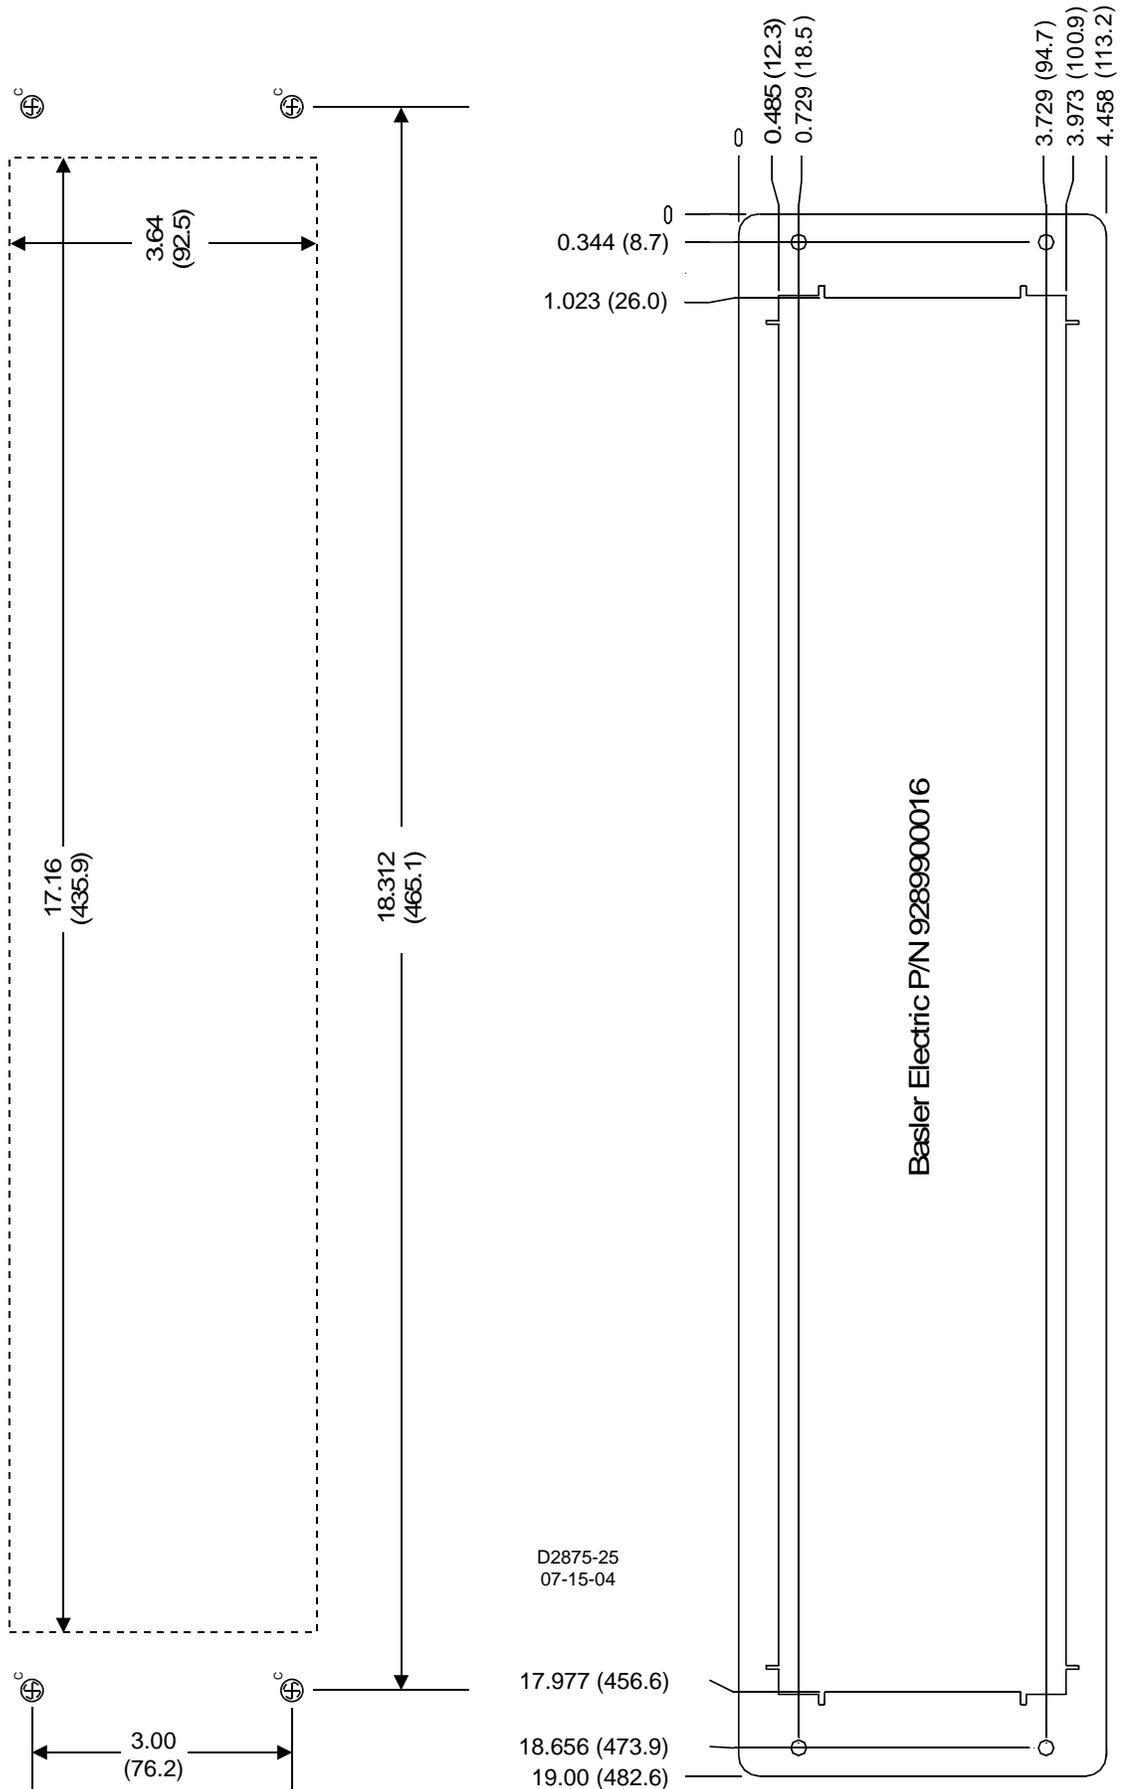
Dovetailed H1 Relay Escutcheon Plate and Cutout Dimensions
